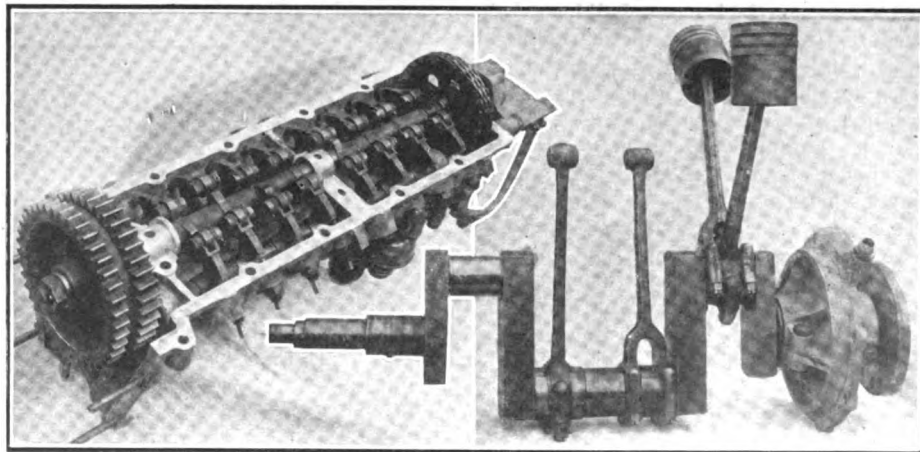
Left—Camshaft assembly showing cam-roller construction
